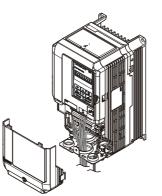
Drive Replacement: Removing the Terminal Cover
